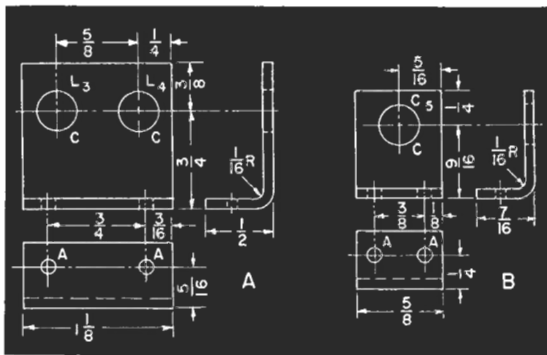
Detail drawings for fabricating the angle brackets used to mount the following components in the 144-megacycle exciter: "A"—coils L_3 and L_4 ; and "B"—capacitor C_5 . Holes on the main chassis should be marked for location from these brackets.
